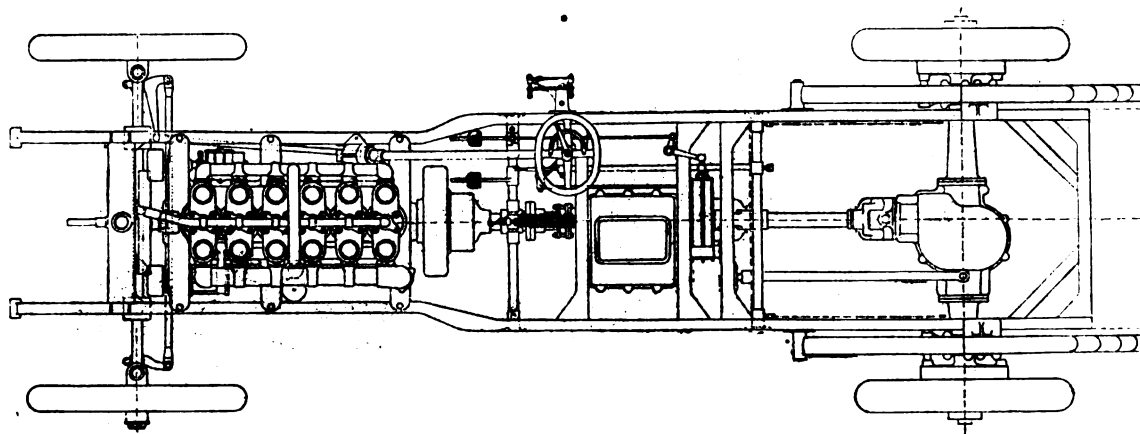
Plan of Chassis of Germain Six-Cylinder Car.
